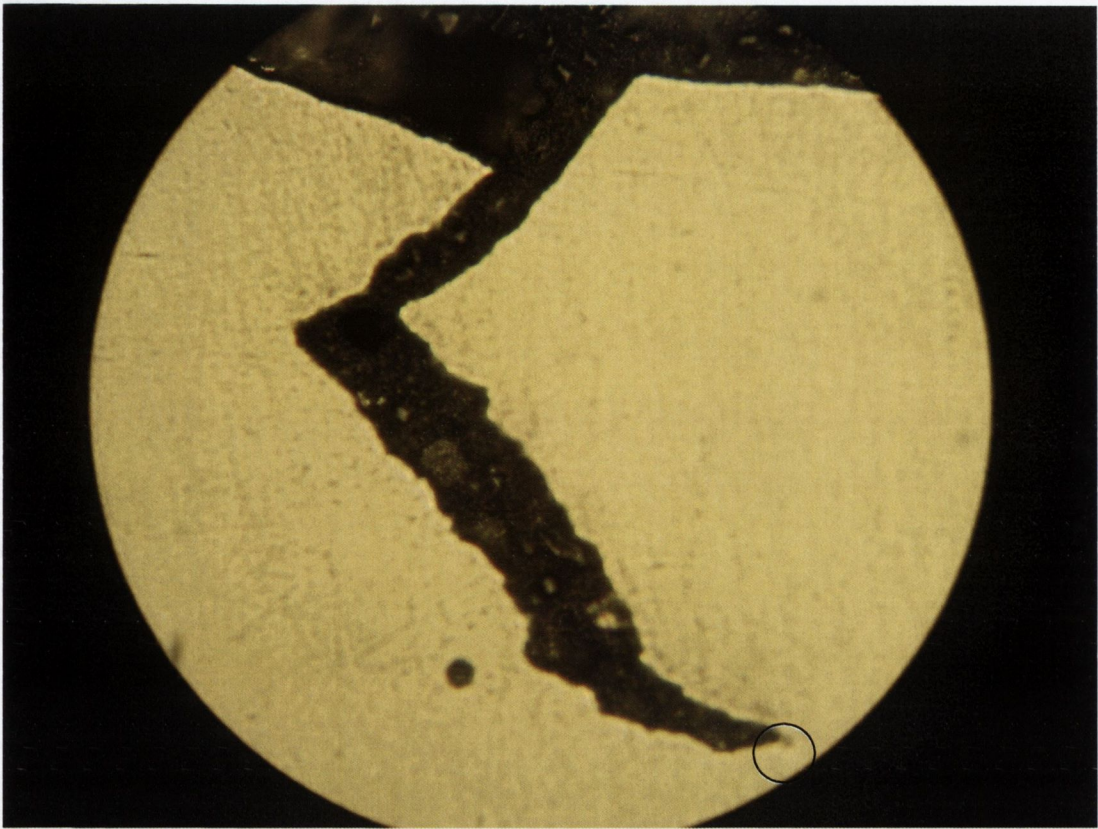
Photograph of a crack in the second groove after 6 rotations of the workpiece. (x500)
